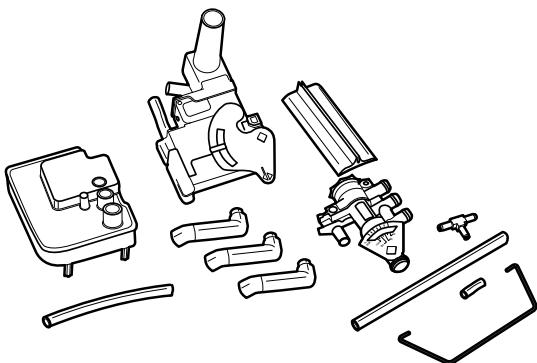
Components Selected From Universal Control Package for Installation on 37HS1 with 23-in. Diffuser
